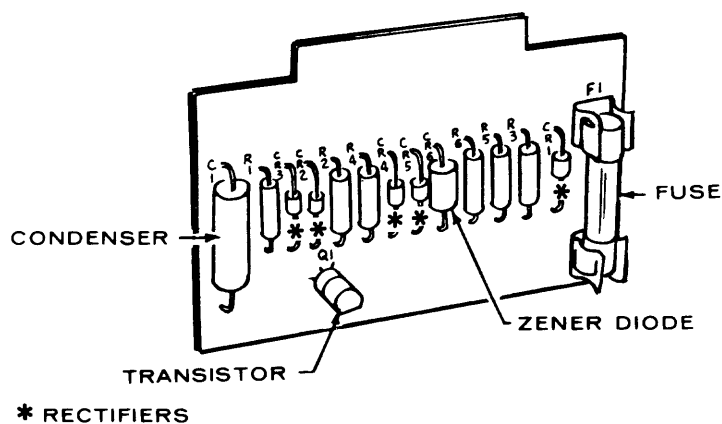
300-0747 PRINTED CIRCUIT BOARD
